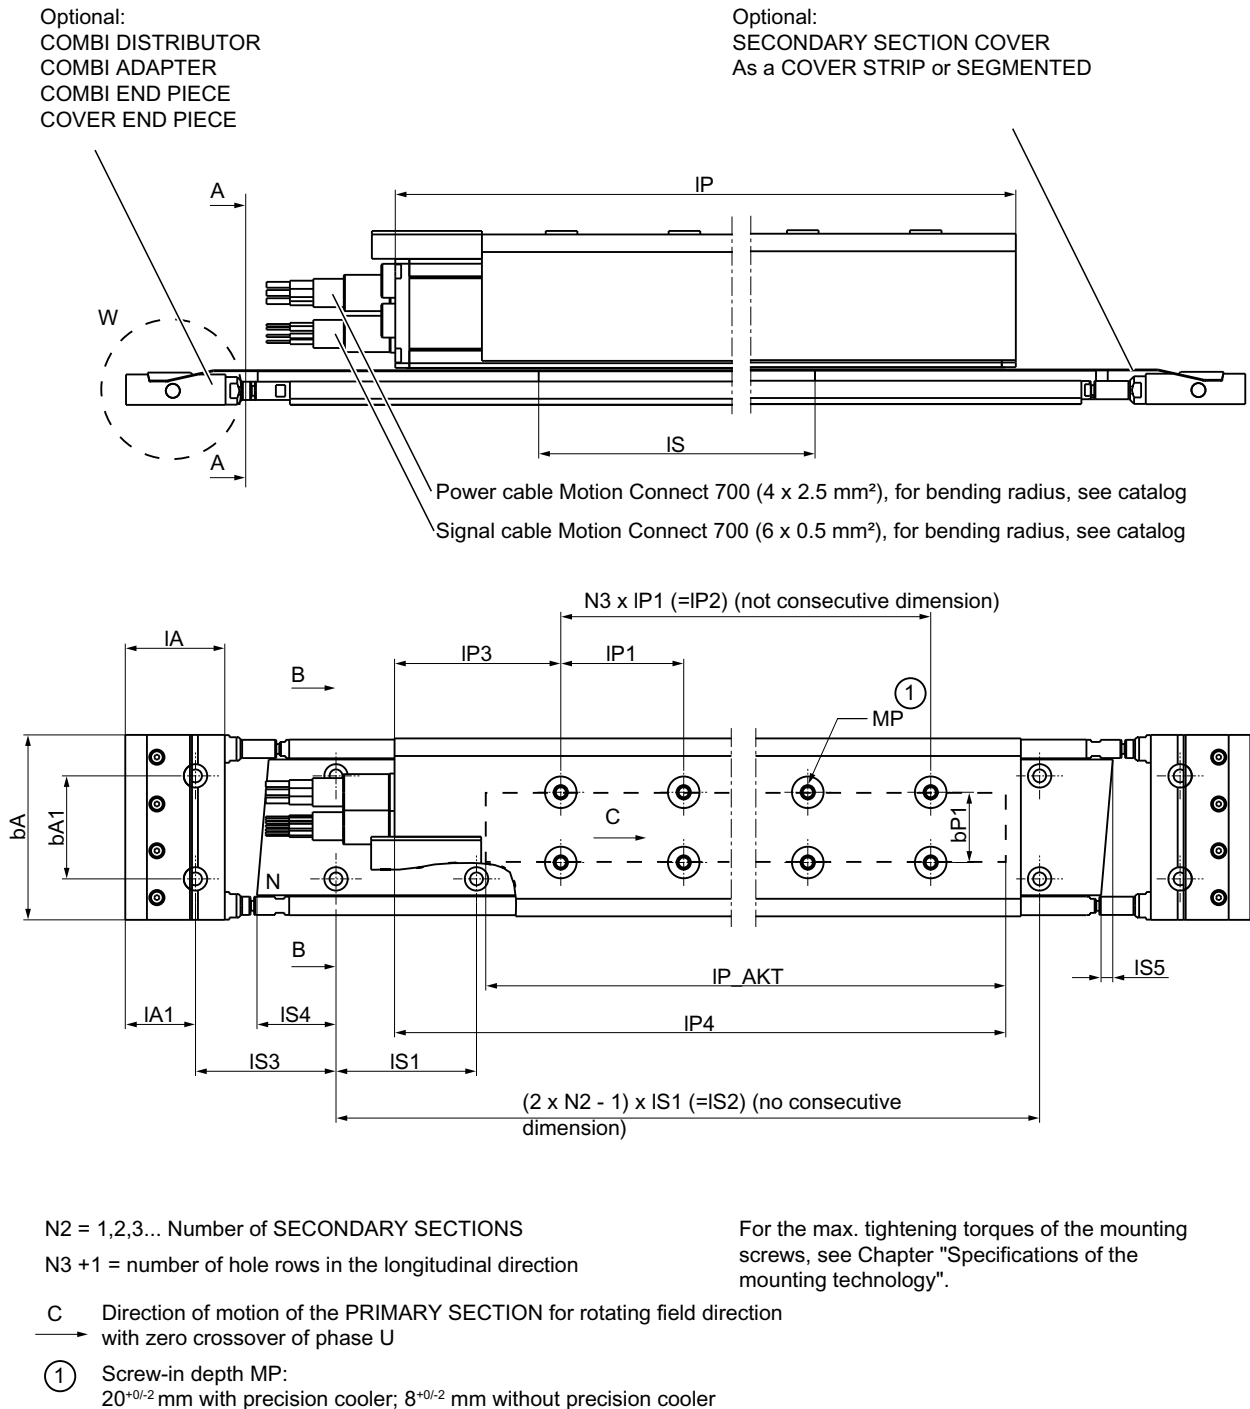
Installation dimensions for 1FN3050 motors with two cable connections
